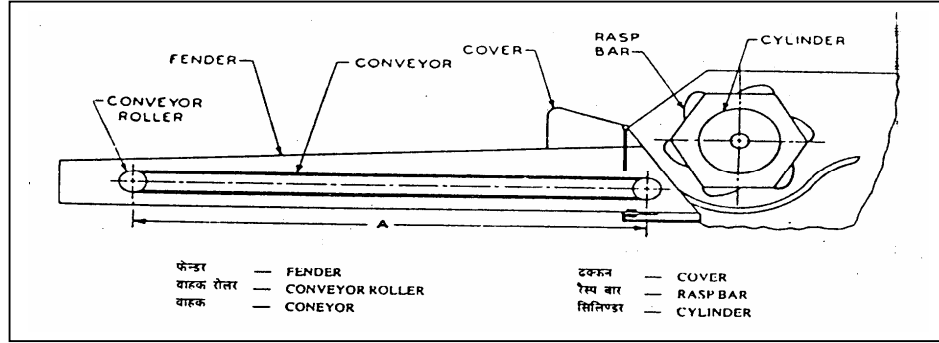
ARRANGEMENT FOR FEEDING CONVEYOR FOR RASP-BAR TYPE THRESHER
